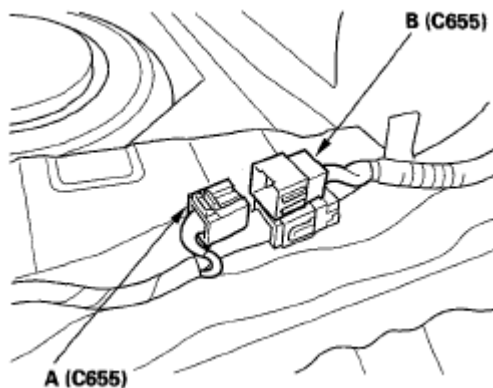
Identifying Right Side Wire Harness 16P Connector C655 And Left Side Wire Harness Connector C655
